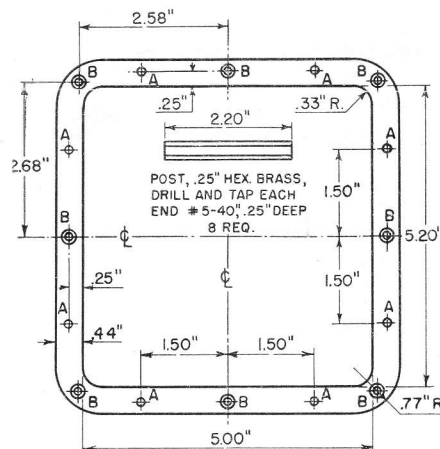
Details of flanges and posts. Front flange takes holes "A" only, middle flange holes "A" and "B", back flange holes "B" only. Holes, #25 drill. Holes "B" counter-sunk for #5 flat head screws. Flanges can be made of $\frac{1}{16}$ " steel or brass.
